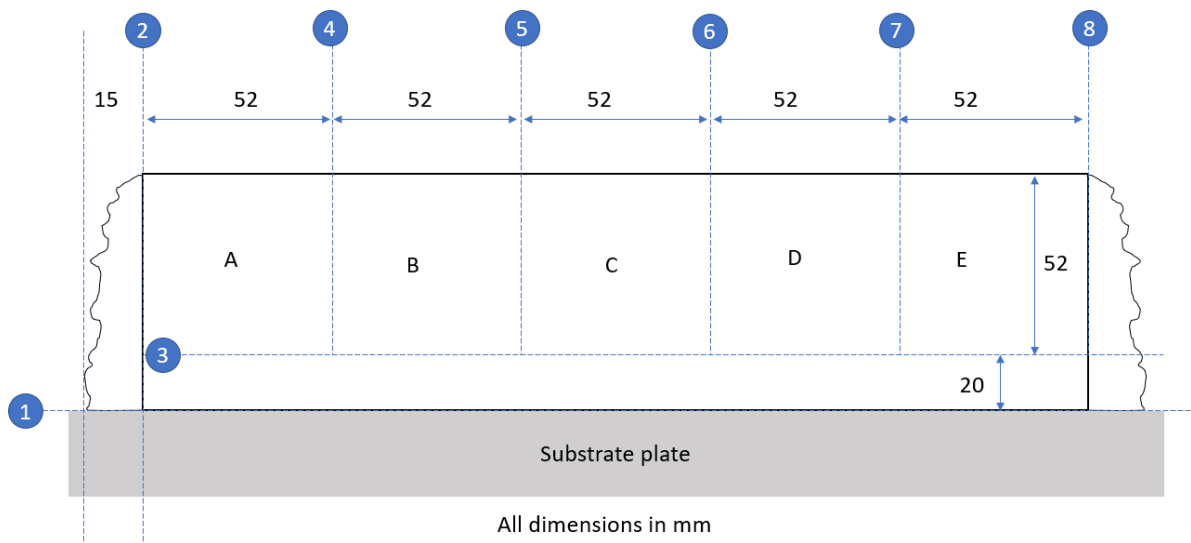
Cutting plan for WAAM Walls 2 and 3. 5-off compact tension specimens were extracted from each wall, indicated by sliced.
